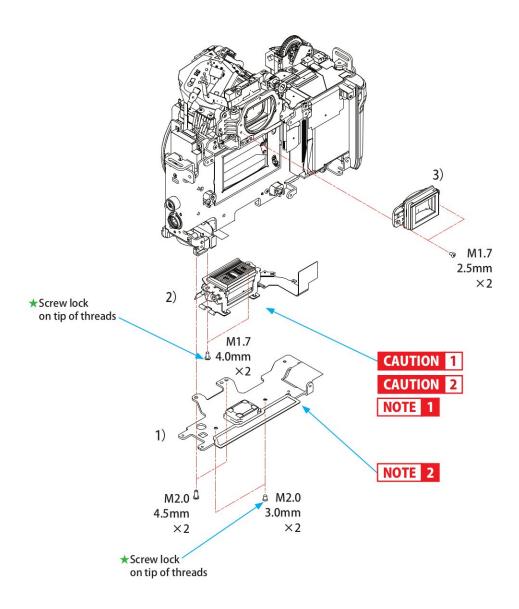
Baseplate / AF Sensor Unit / Eyepiece Cover Removal
